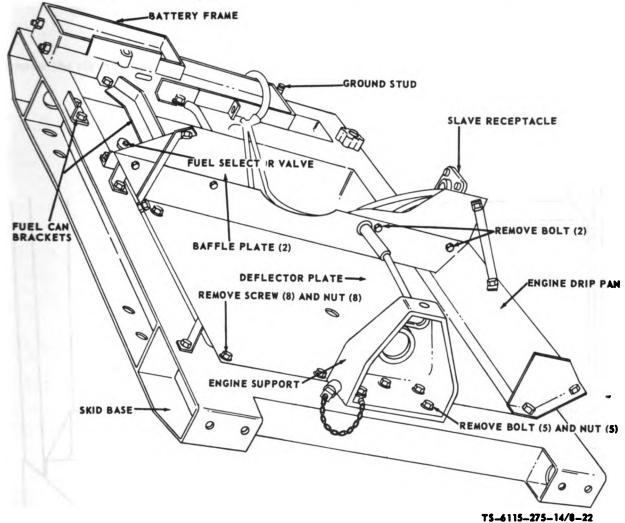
Engine, engine support, drip pan, deflector plates and baffleplates, removal and installation (Model MEP-023A).
